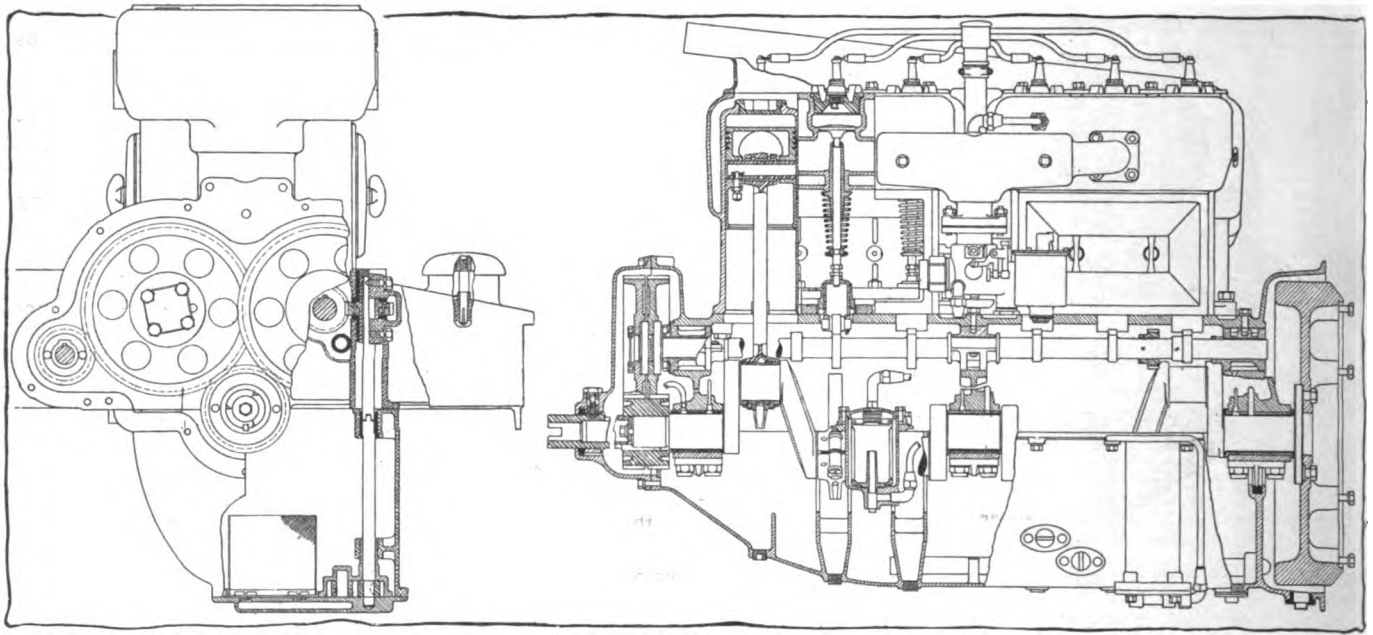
Part sectional end and side views of motor used in the 1914 Chalmers six, showing force-feed oiling
